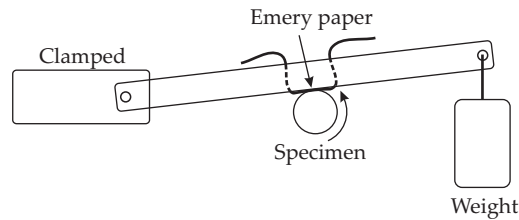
Device for making circumferential grooves, mounted in a lathe.
